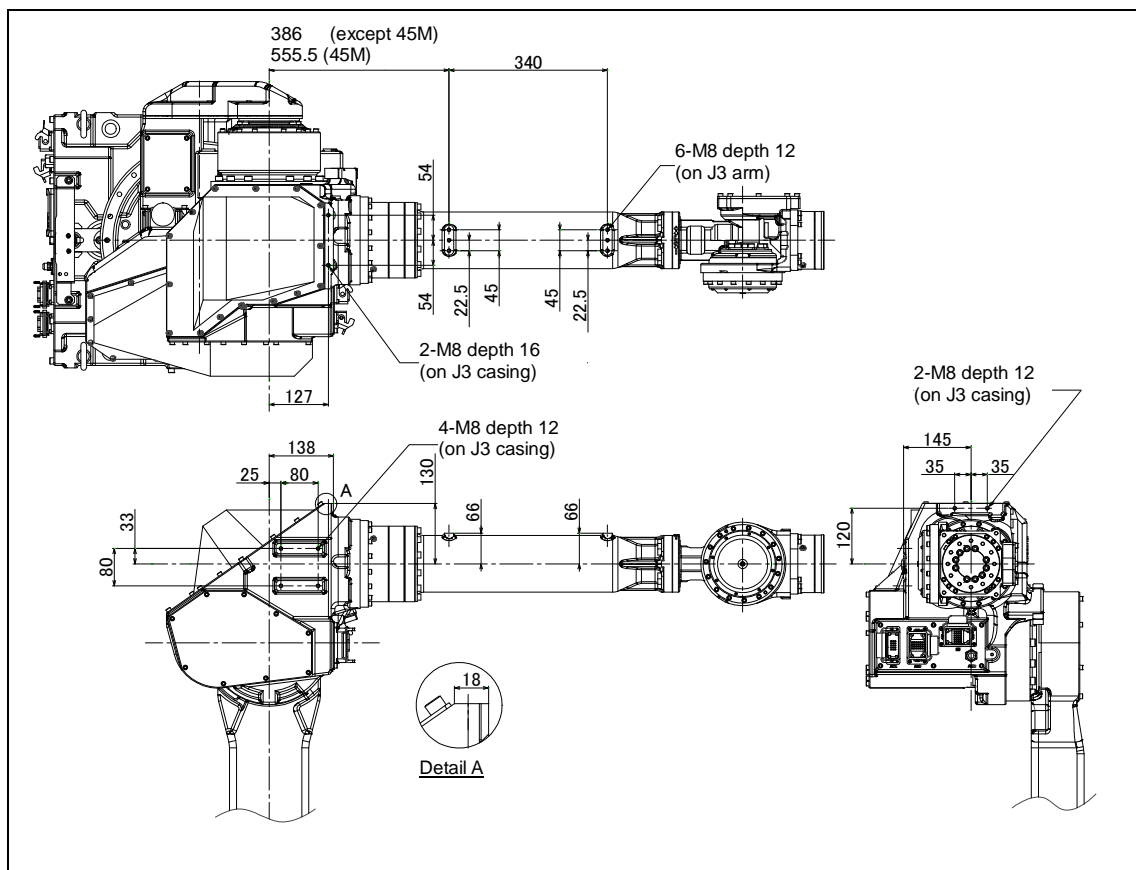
(a) Equipment mounting surfaces (M-710iC/50/70/45M/50E)
